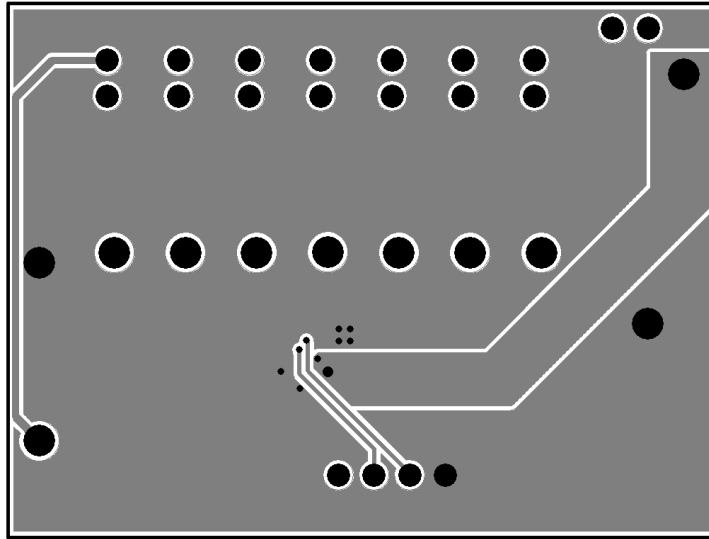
SP7680EB PC LAYOUT BOTTOM SIDE
